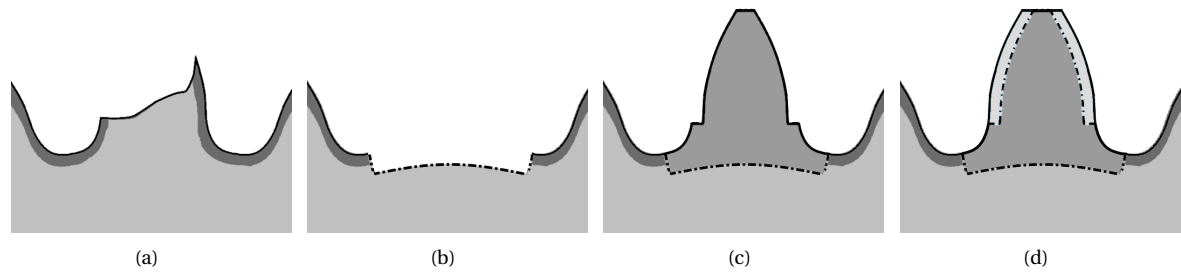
The four steps of the repair cycle of a tooth with (a) the broken tooth, (b) tooth removal, (c) core material deposition and (d) flank material deposition. The carburized layer is illustrated with dark gray.
